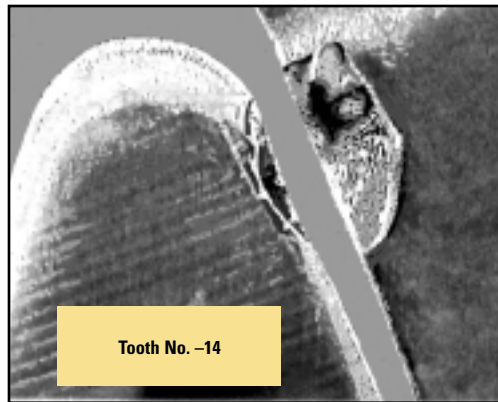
Chipping of carbide hob cutting edge (Example 3).
